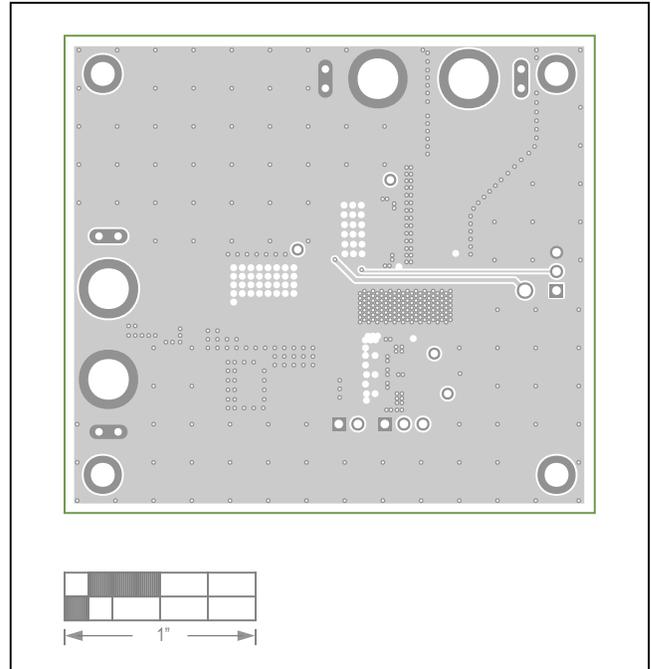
MAXM17536 5V Output EV Kit PCB Layout—Layer 2
